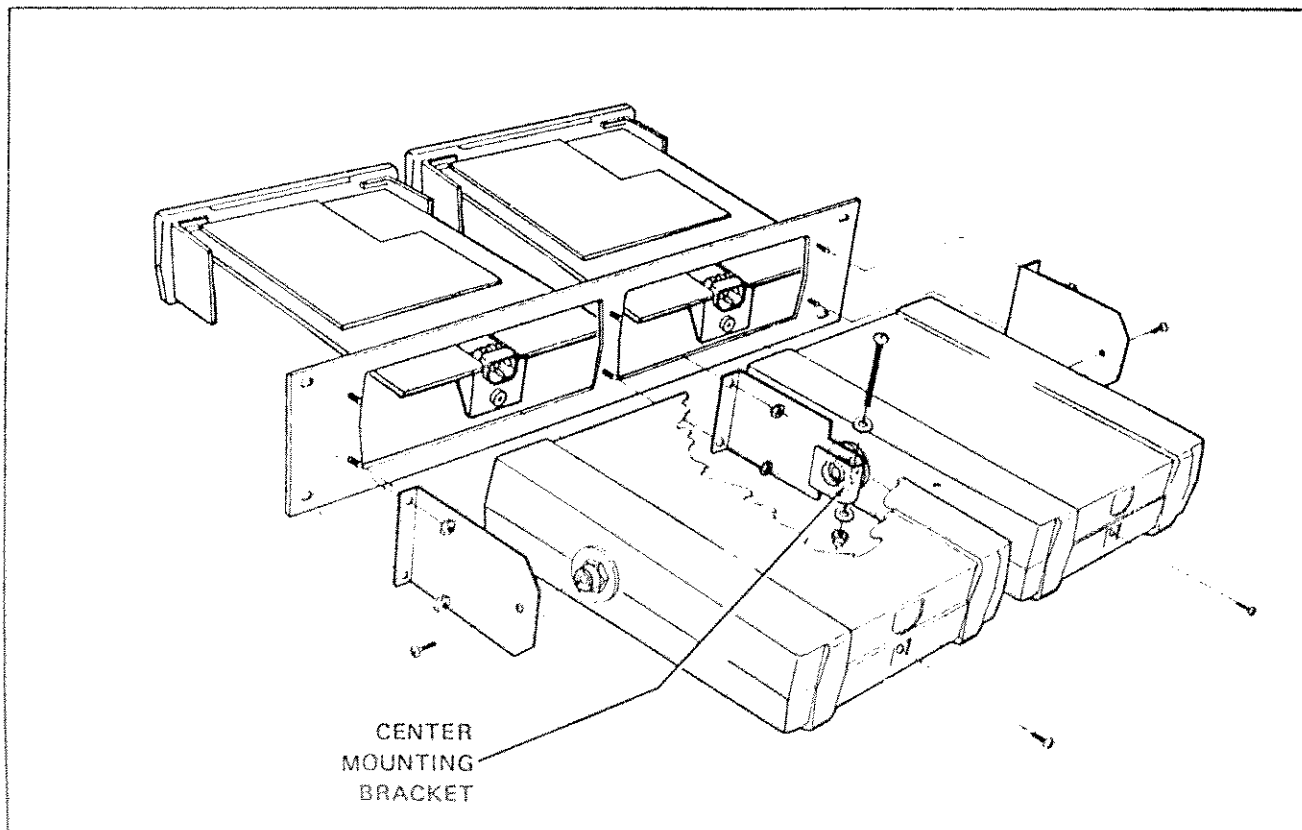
Rack Mounting Kit, Side-by-Side Mounting
